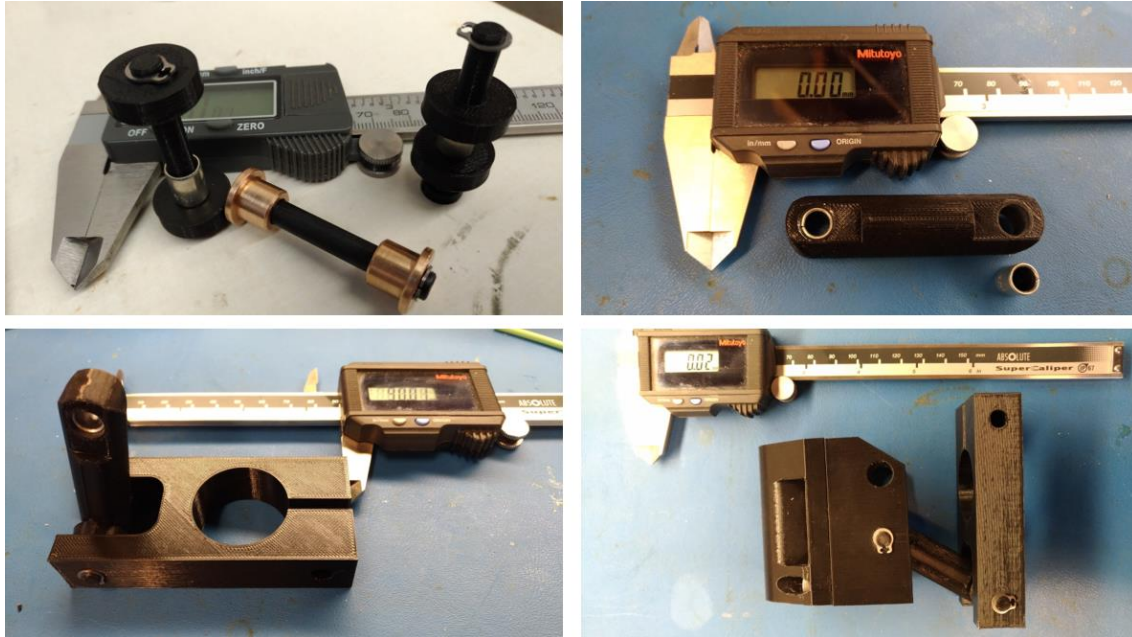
32. The assembly phase of 3D printed and commercial components of the pan & tilt mechanism.
